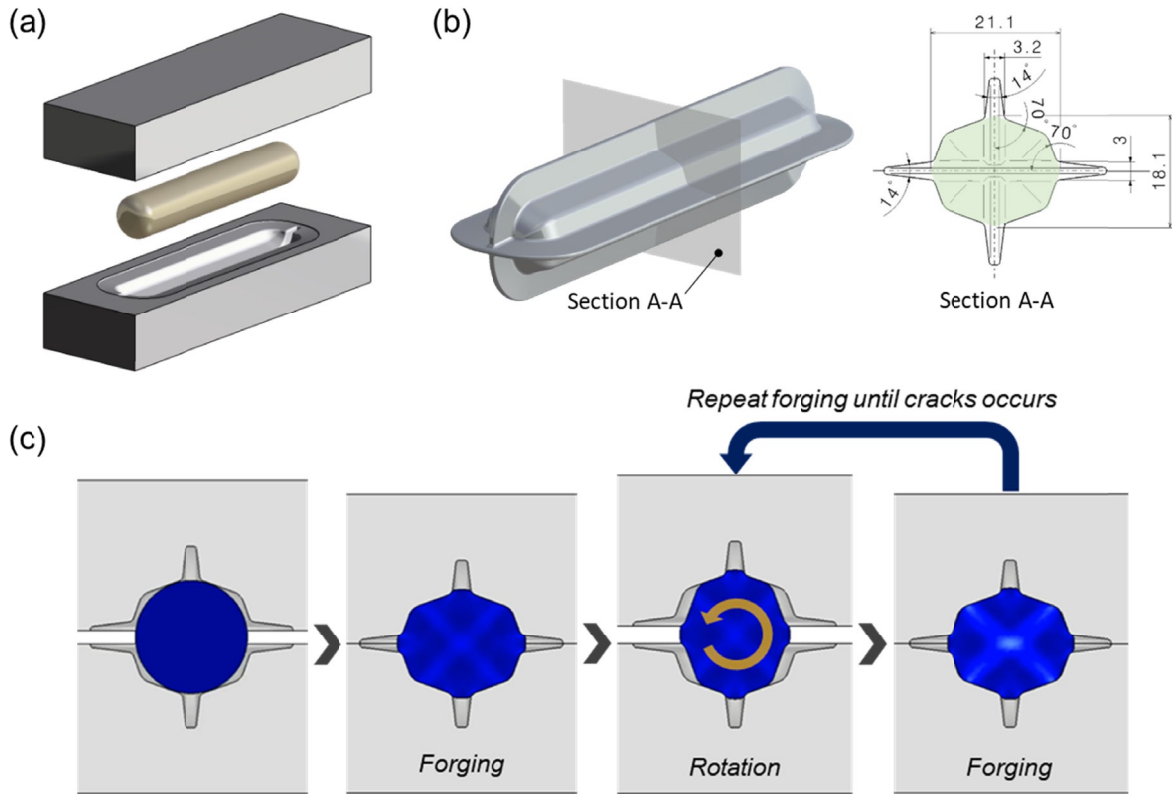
Schematic 3D views of (a) dies and workpiece for multi-forging, (b) die cavity shape, and (c) biaxial alternate forging process
